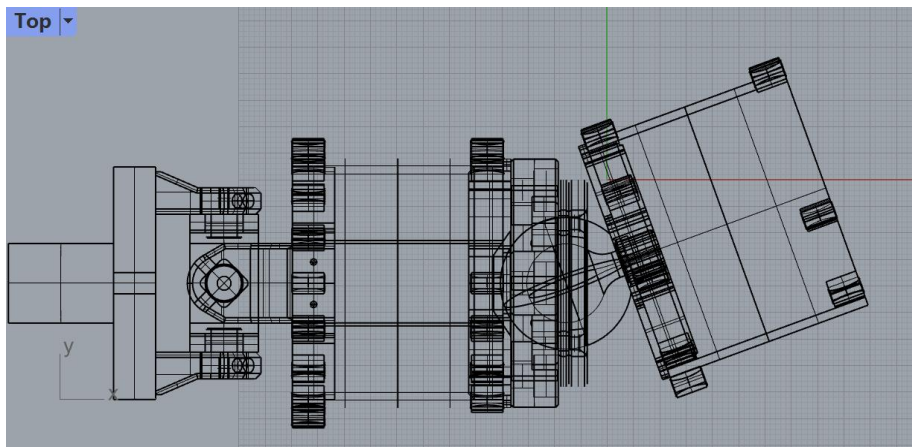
Assembly drawing of spherical joint of snake-like robot.
